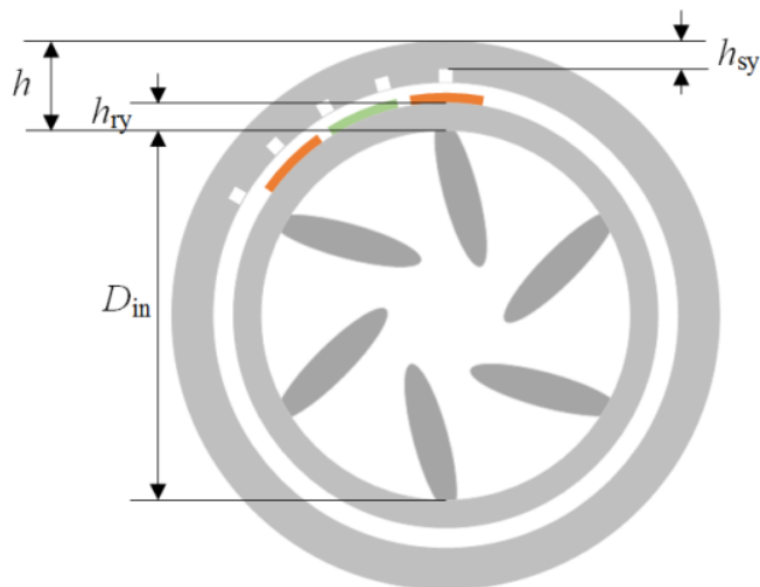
Schematic machine cross section showing the inner rotor diameter D_{in} as well as stator and rotor yoke heights h_{sy} and h_{ry}
